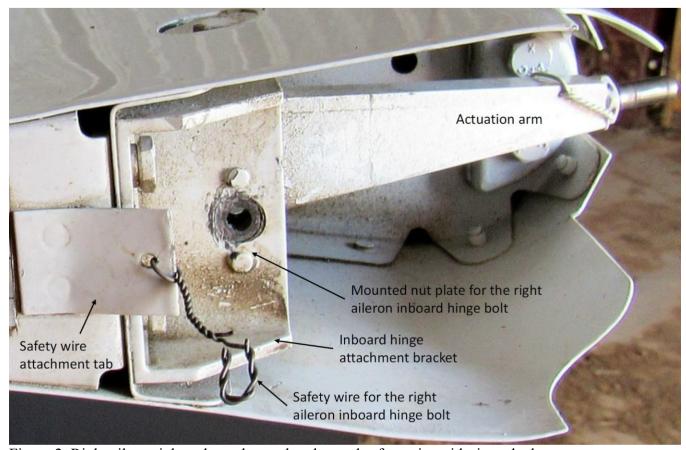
Right aileron inboard attachment bracket and safety wire with riveted tab.
